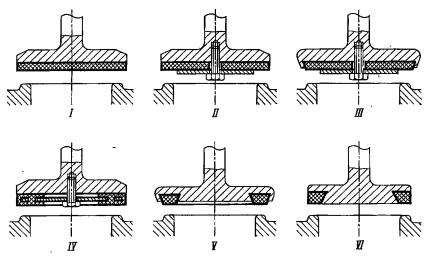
Securing rubber to metal parts (lift-type valve with rubber packing)
